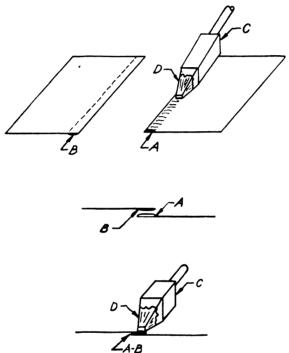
A "sweat" soldered joint: A. Solder applied in a thin film (tinning) with copper (on top), B. Tinned underneath, C. Soldering copper applied (no solder used), D. The tinning on the copper
